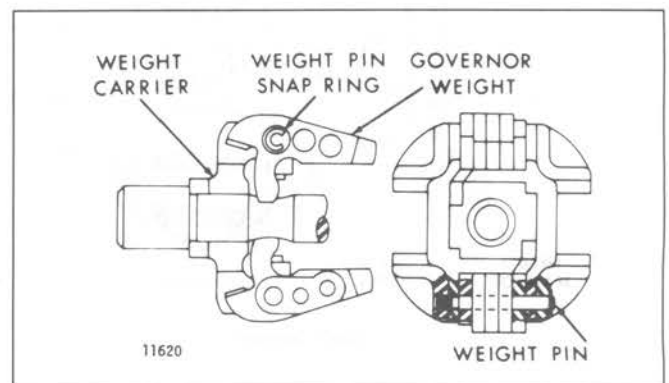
Cross Section of Governor Weight Assembly (Non-Turbocharged Engines)
